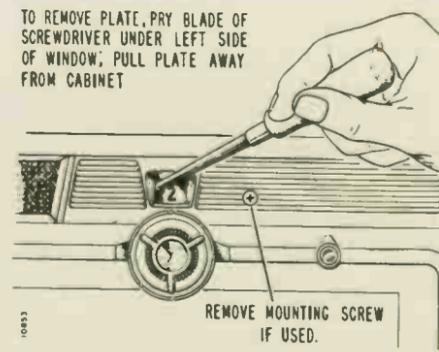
Method of Removing Snap-in Plate Without Mounting Screw.
